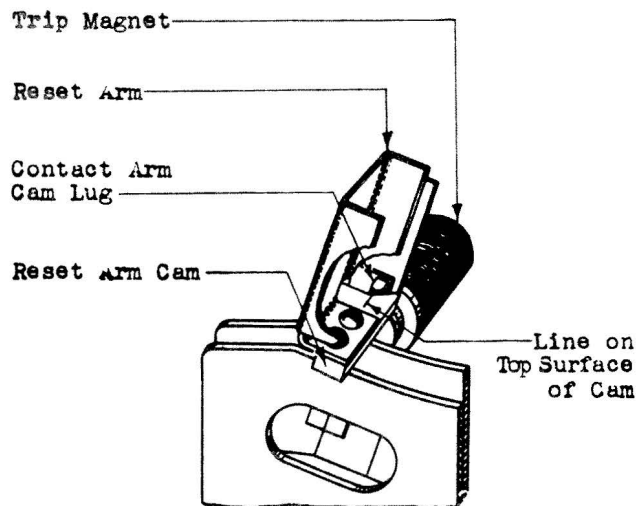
Method of Checking Relative Positions of Contact Arm Cam Lug and Reset Arm Cam
